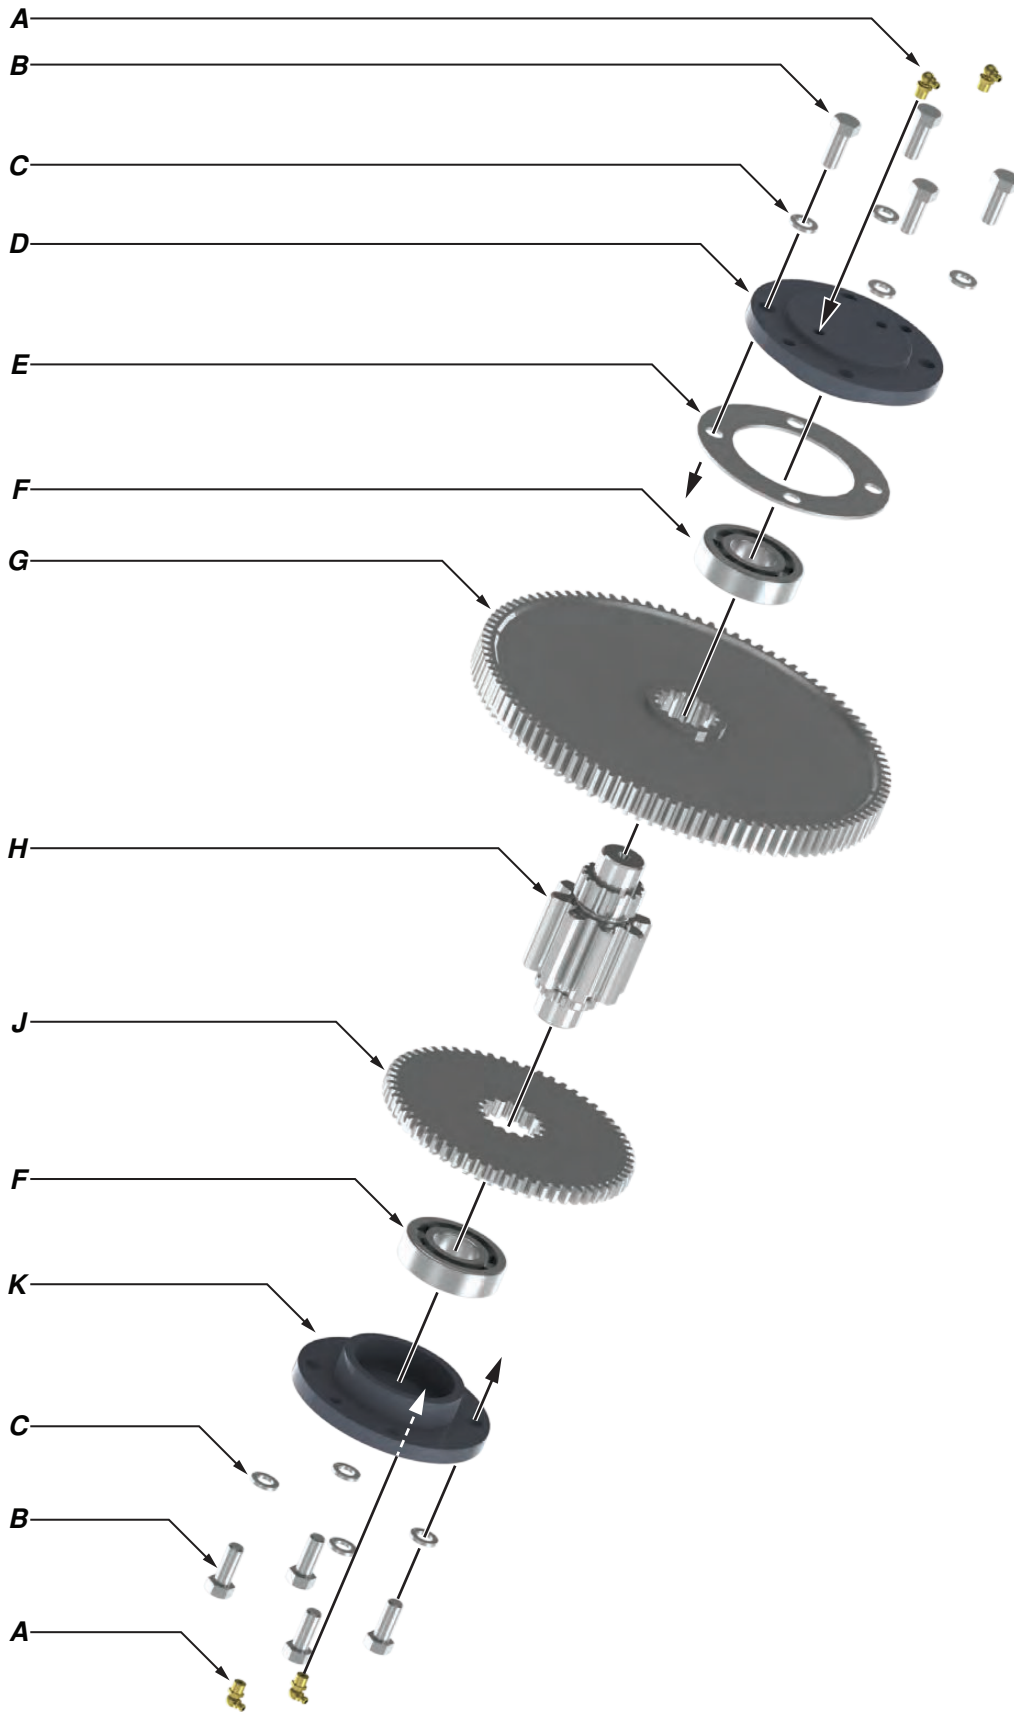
HD9625 Pinion Idler Exploded
